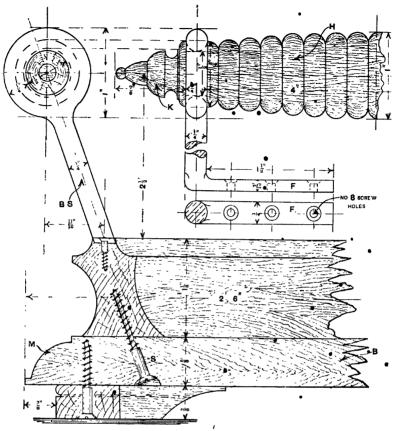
Cross Section and Part Elevation of Tray Handle.
